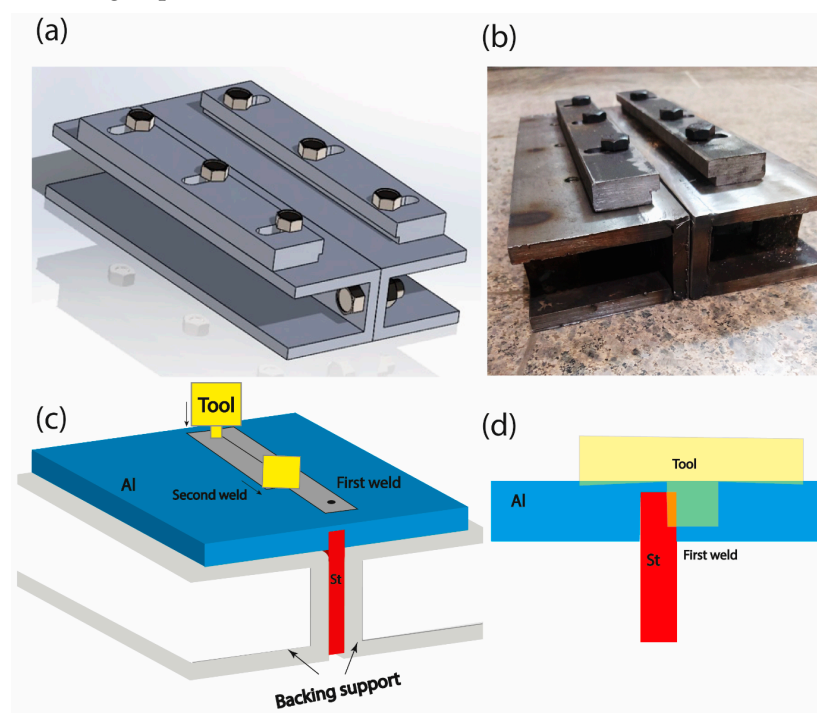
(a) Drawing of the fixture used to perform the T-joint. (b) The fixture for T-jointing. (c) The schematic of the process shows Al and St sheets and the location of the first and second welds. (d) Positioning of the tool with respect to the specimen.
